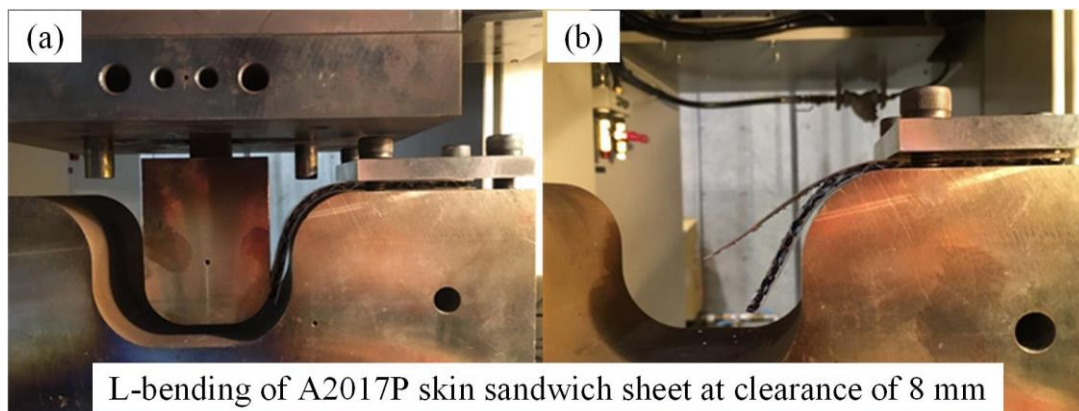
L-bending test of sandwich sheets with A2017P faces at clearance of 8 mm.
